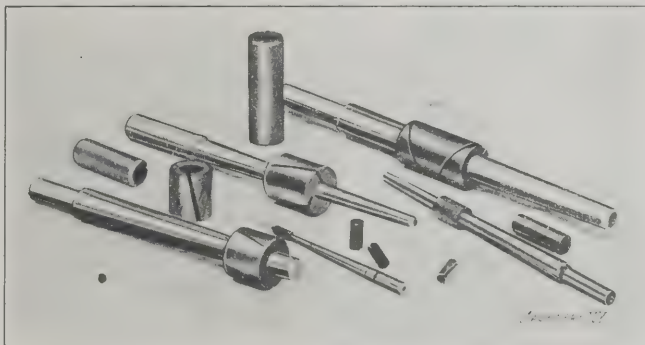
Lap and Lap Arbors used in making Ring Gages
